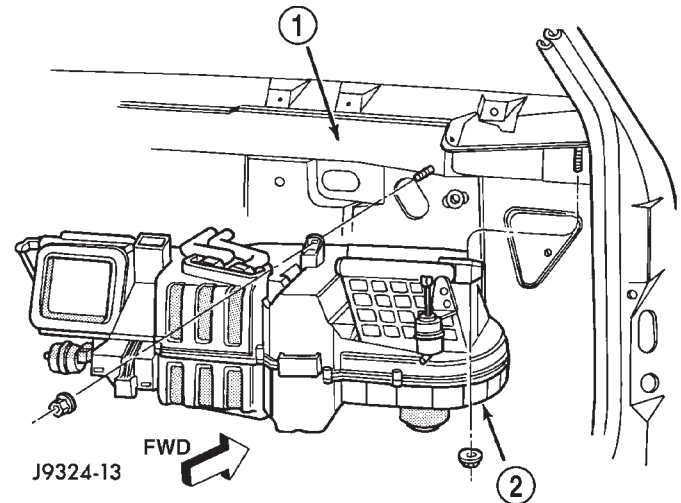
HVAC HOUSING REMOVE/INSTALL
